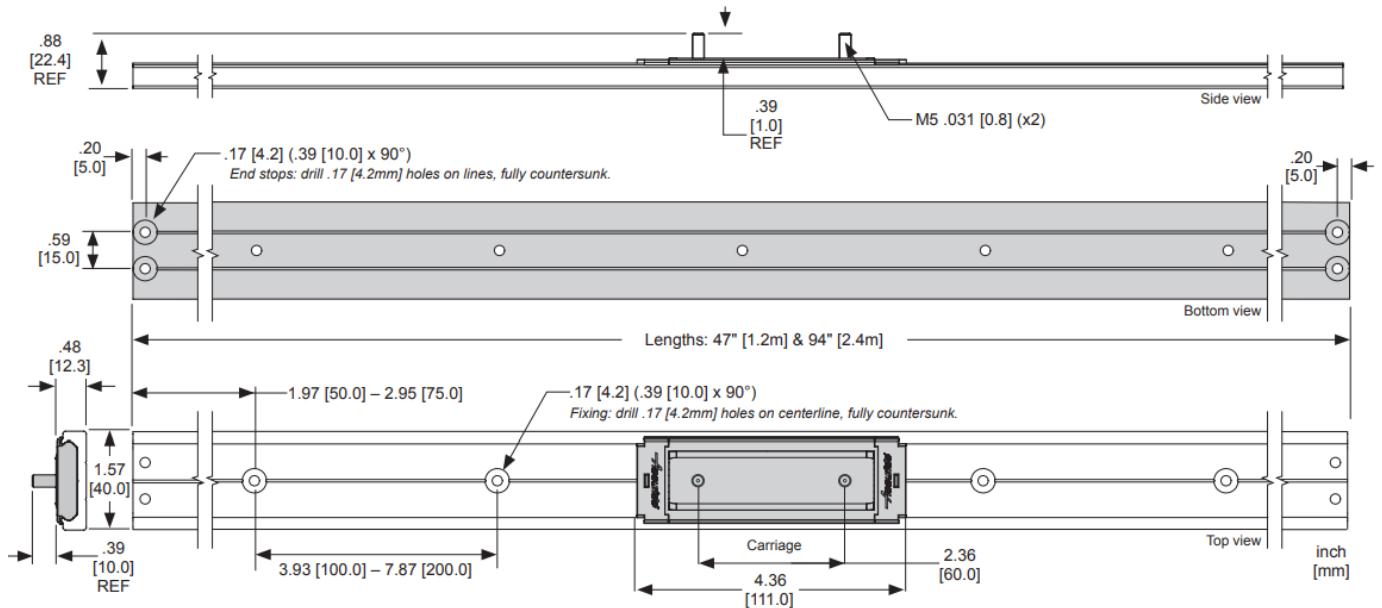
Specific dimensions and placement of holes in the Model 115RC Linear Motion Track System, as well as the Cassette carriage that will be used for mounting [11]
